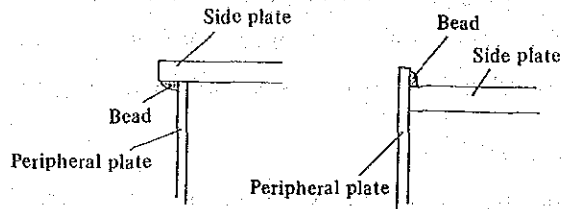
Welded part of the housing (Suggested one)
